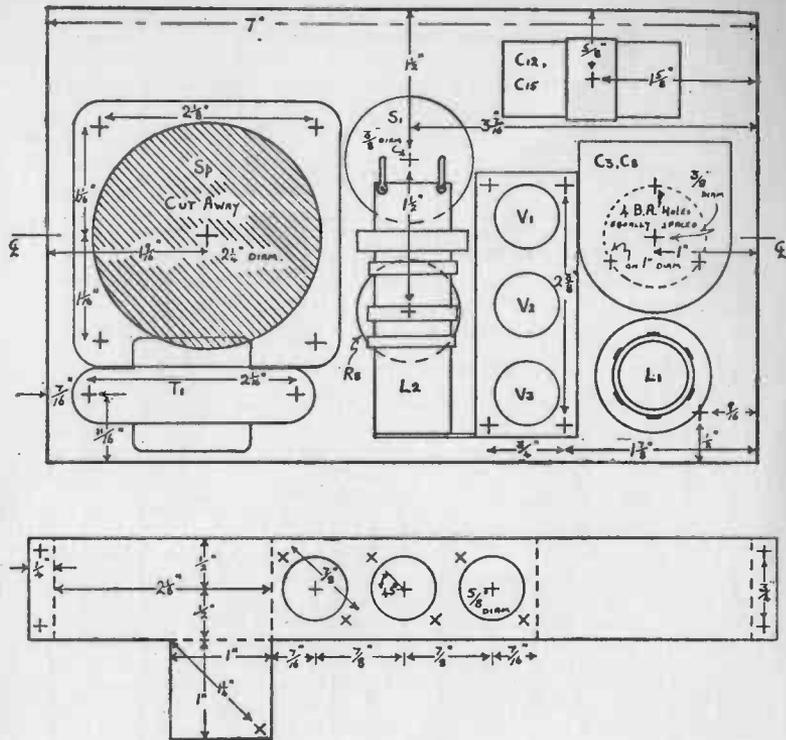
Panel Dimensions, Sub-chassis and Side Constructional View of the "Carri-Minor"
